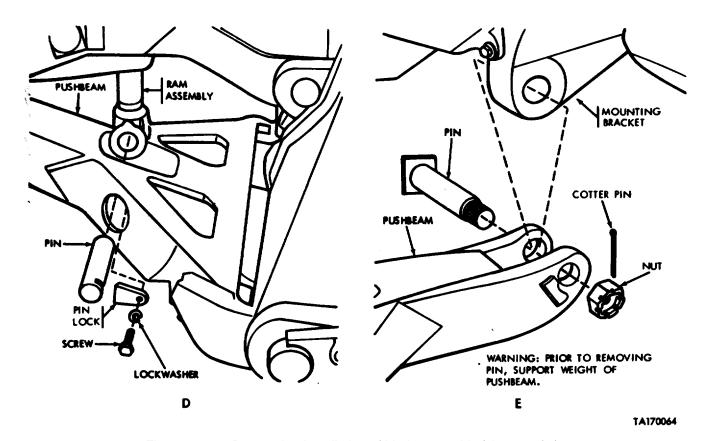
Removal or installation of blade assembly (sheet 2 of 2)
